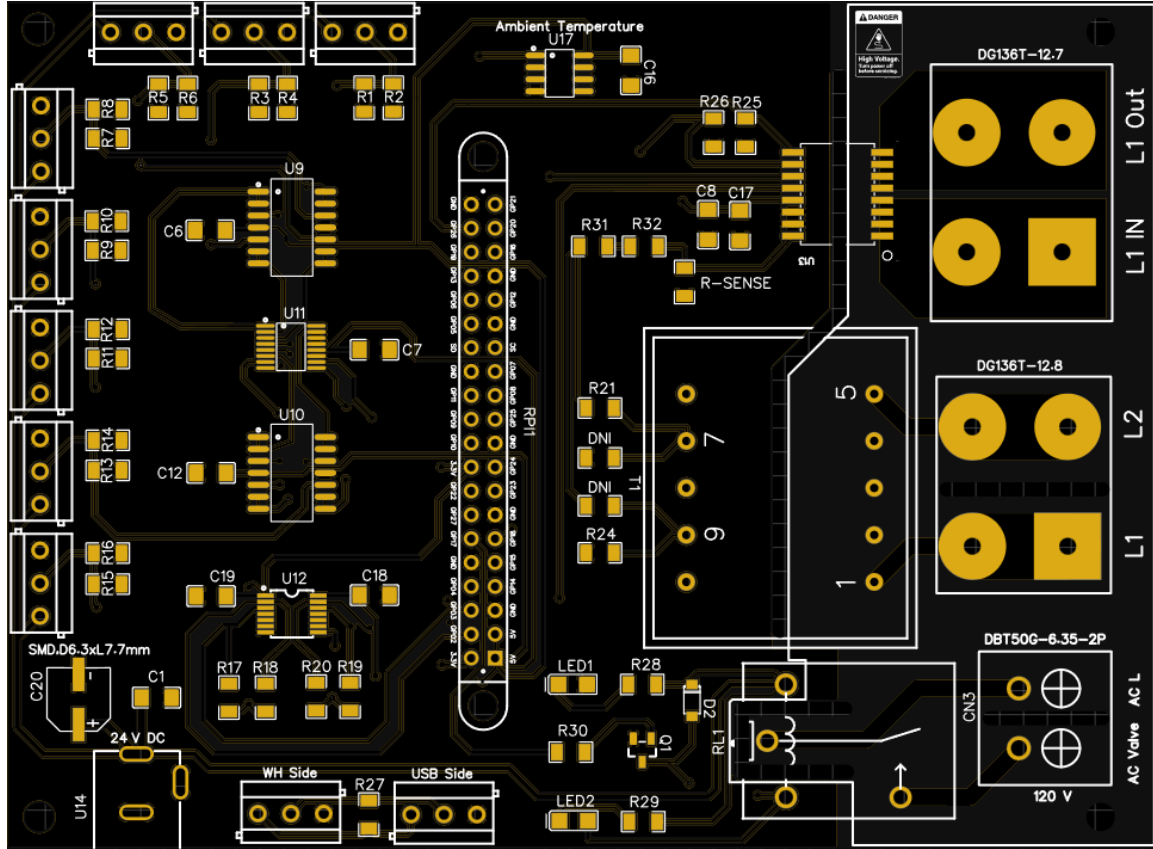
PCB 2D top-side view showing component placement, silkscreen labels, sensor terminal blocks along the left edge, Raspberry Pi GPIO header at center, and high-voltage AC terminals (L1 IN, L1 OUT, L2, AC valve) on the right side. Mounting holes are visible at all four corners.
